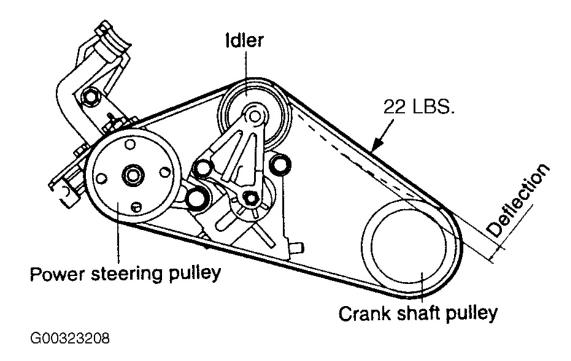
Measuring Power Steering Belt Deflection Courtesy of KIA MOTORS AMERICA, INC.
